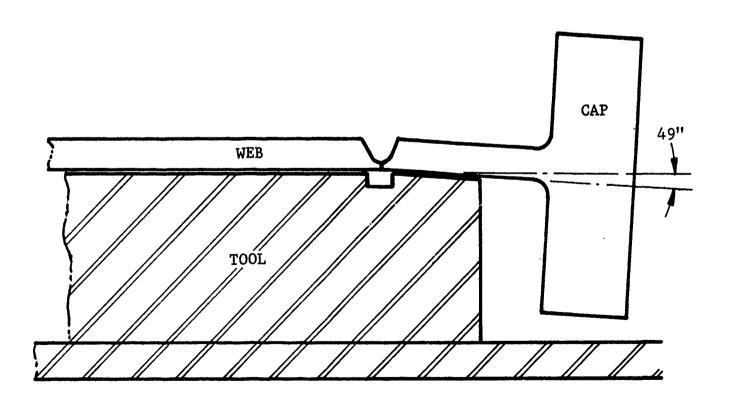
WELD JOINT DESIGN FOR GTA WELDING OF 10 NICKEL STEEL
